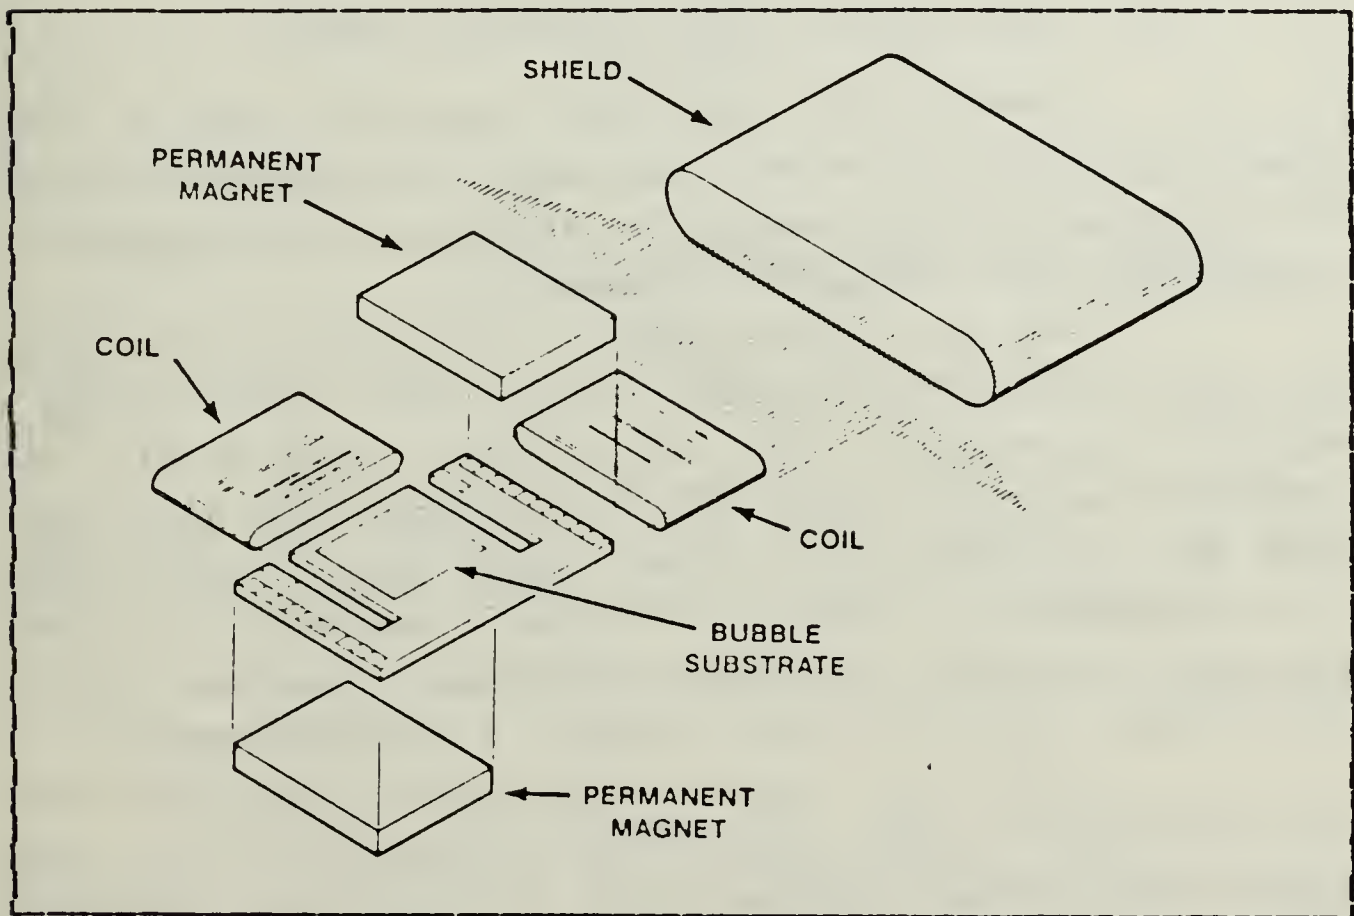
7114 Magnetic Bubble Memory Chip Assembly.
